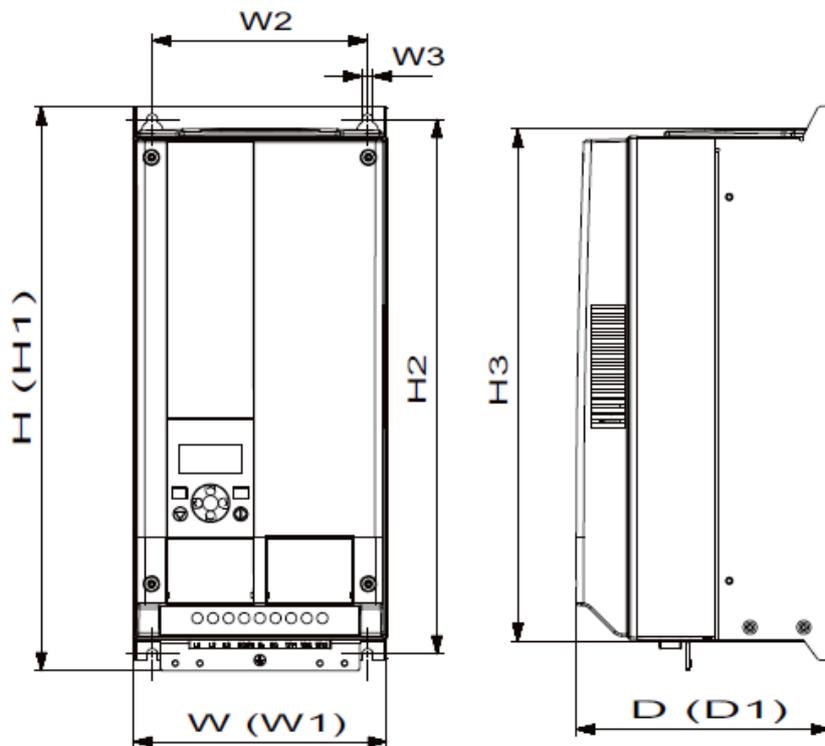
Vacon 20 dimensions, MI4 - MI5
